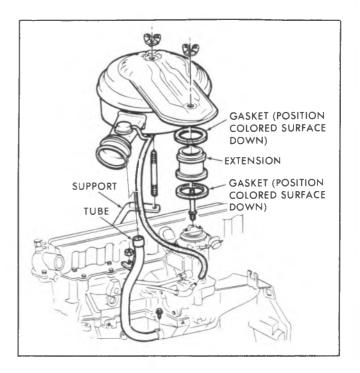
E-28--Air Cleaner-L6-Non-Integrated Head
